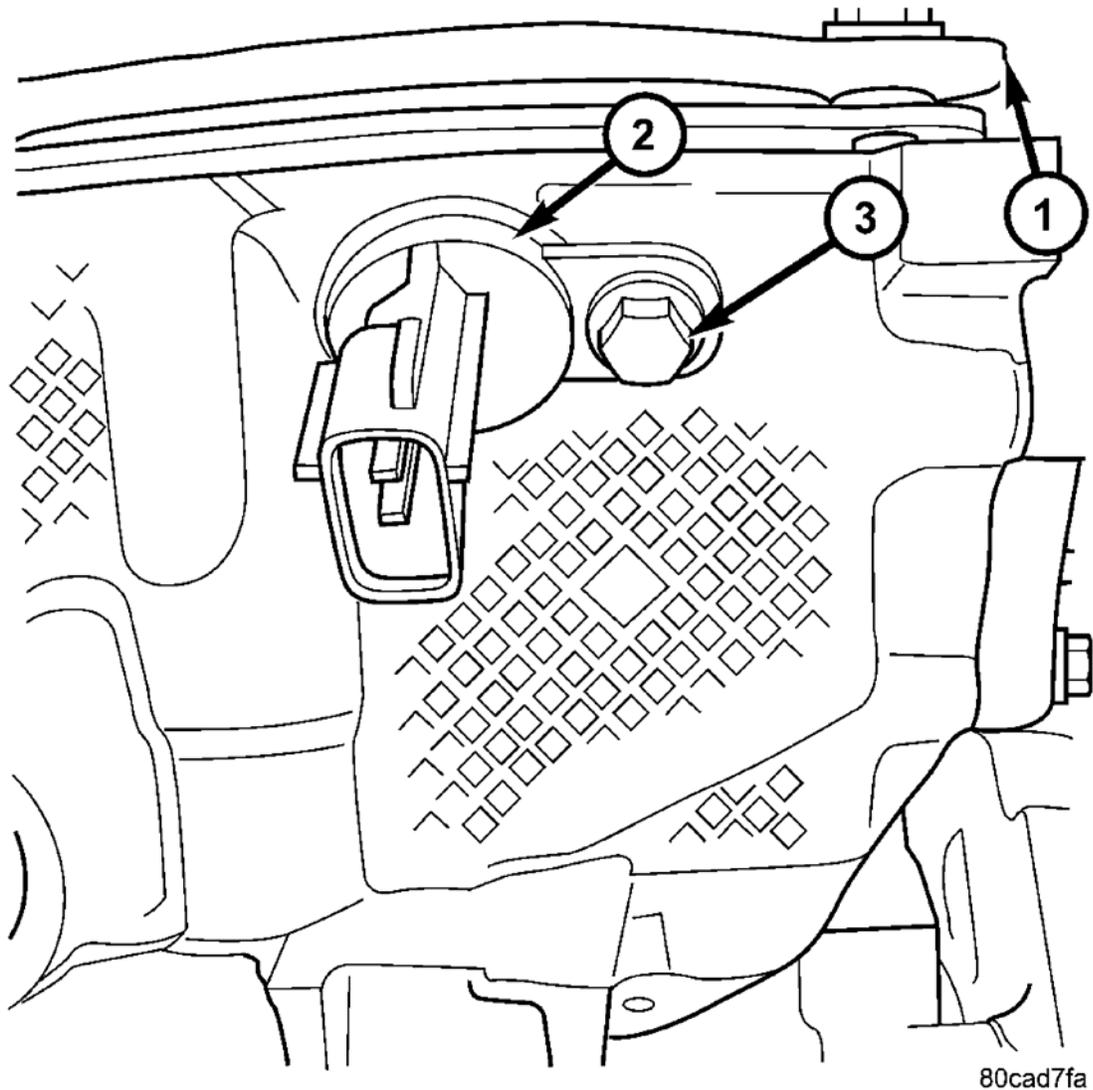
Camshaft Position Sensor, Cylinder Head & Screw
